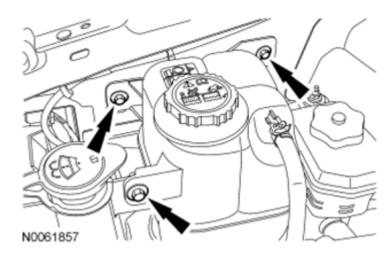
Locating Degas Bottle Bolts Courtesy of FORD MOTOR CO.
